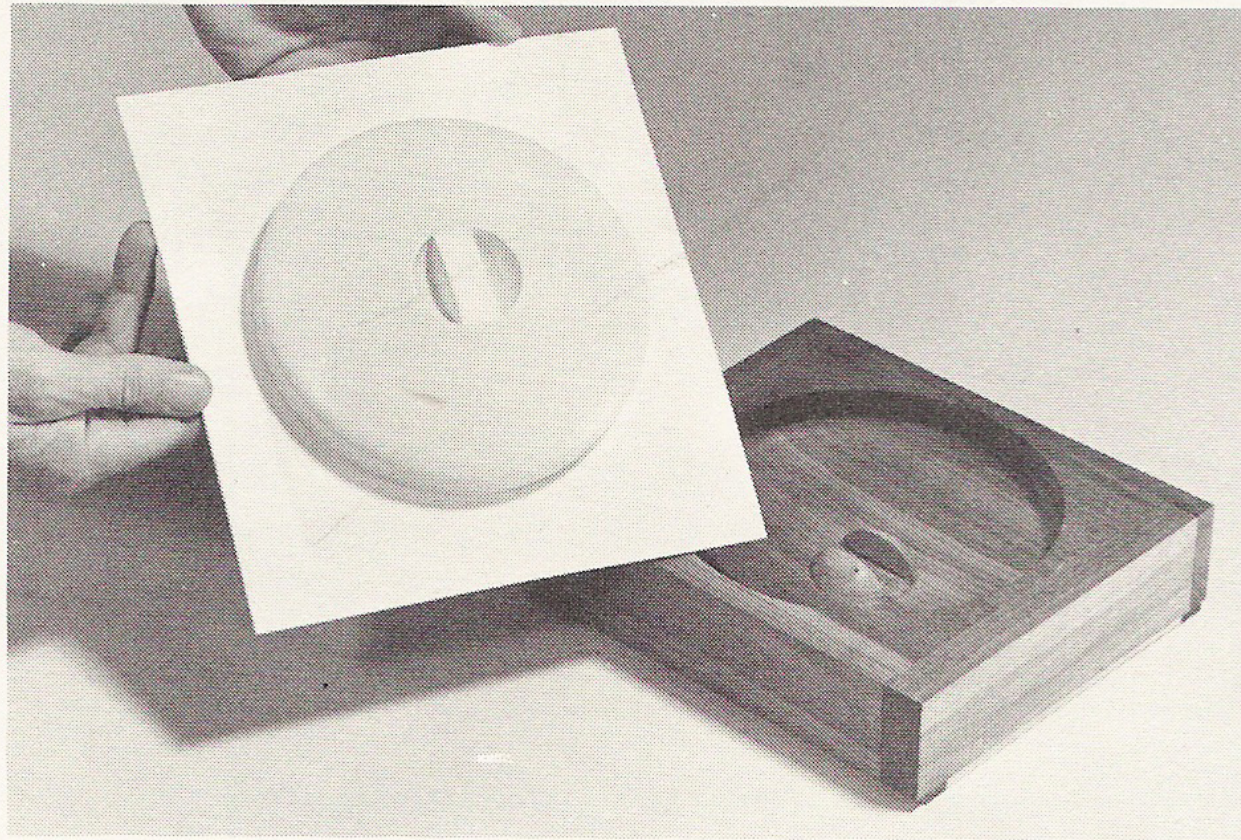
The formed container lid is inspected after removal from the mold.
